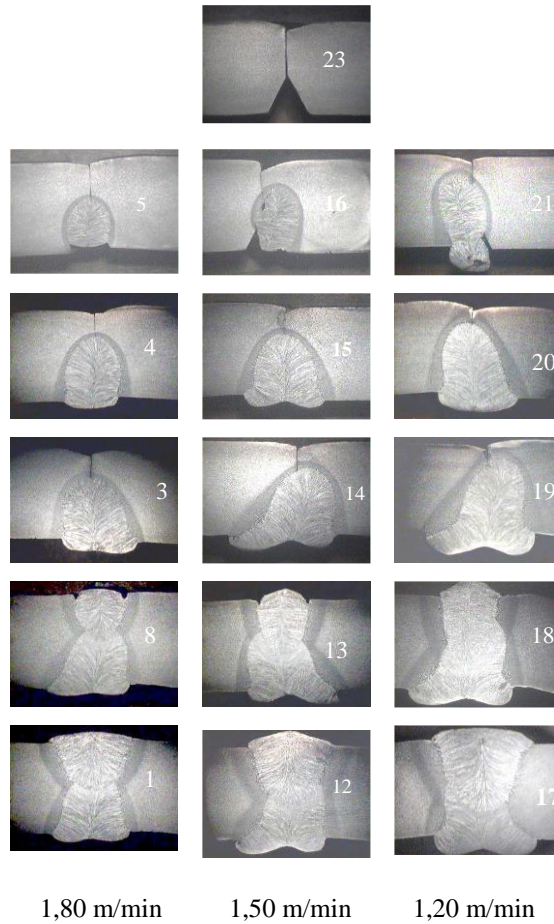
The sequence of the weld seam with the different weld speeds.
